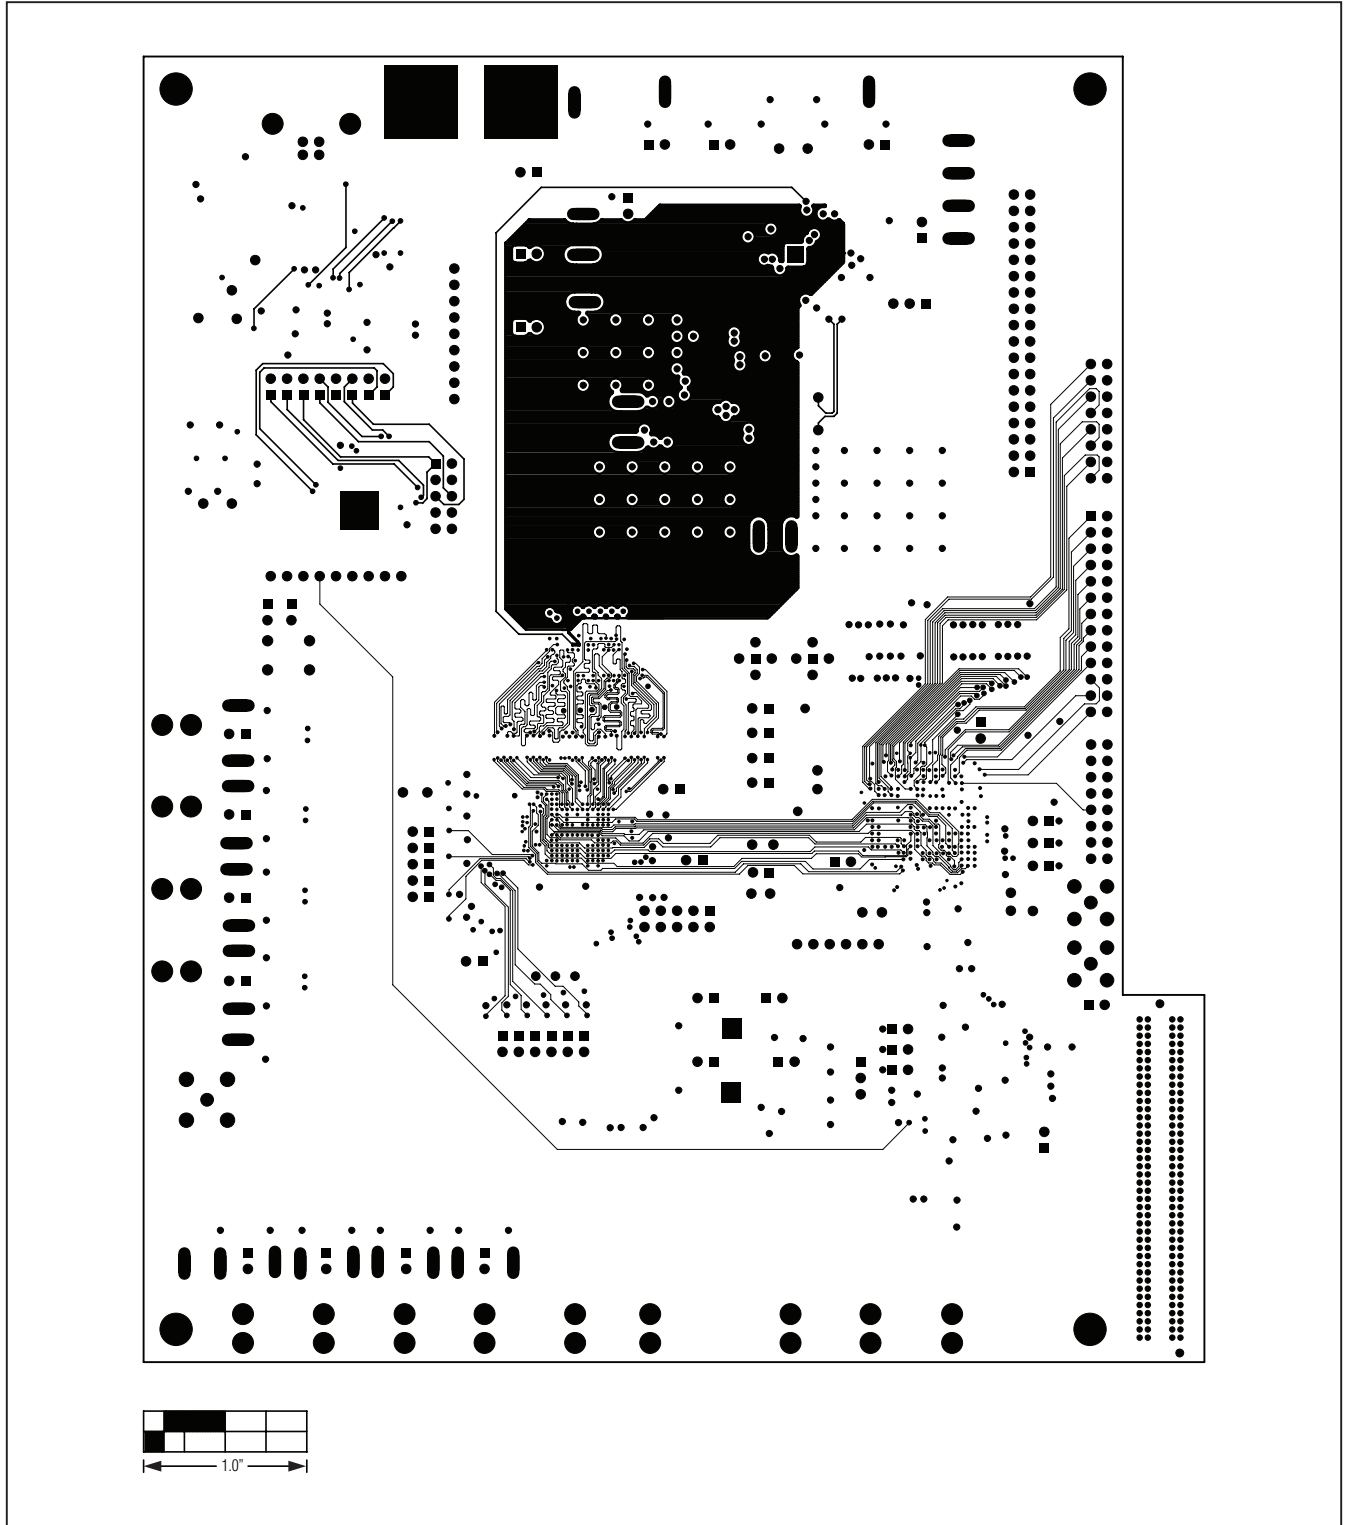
MAX9530 EV Kit PCB Layout—Power Layer 3
